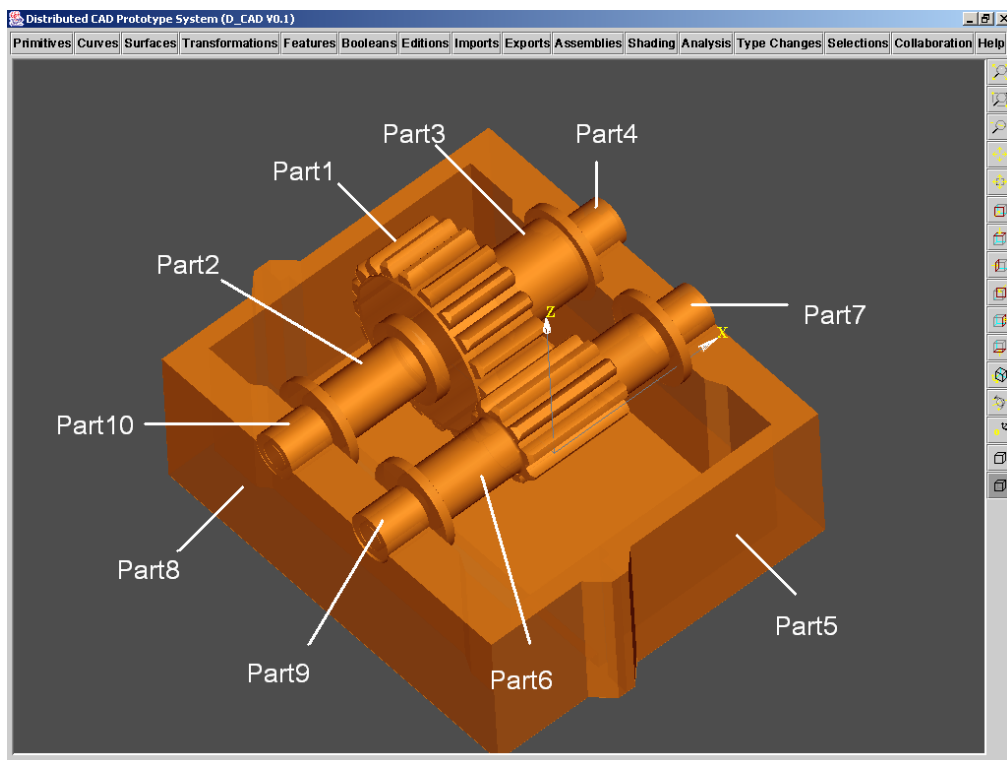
Simplified gearbox assembly displayed in design Client 1
